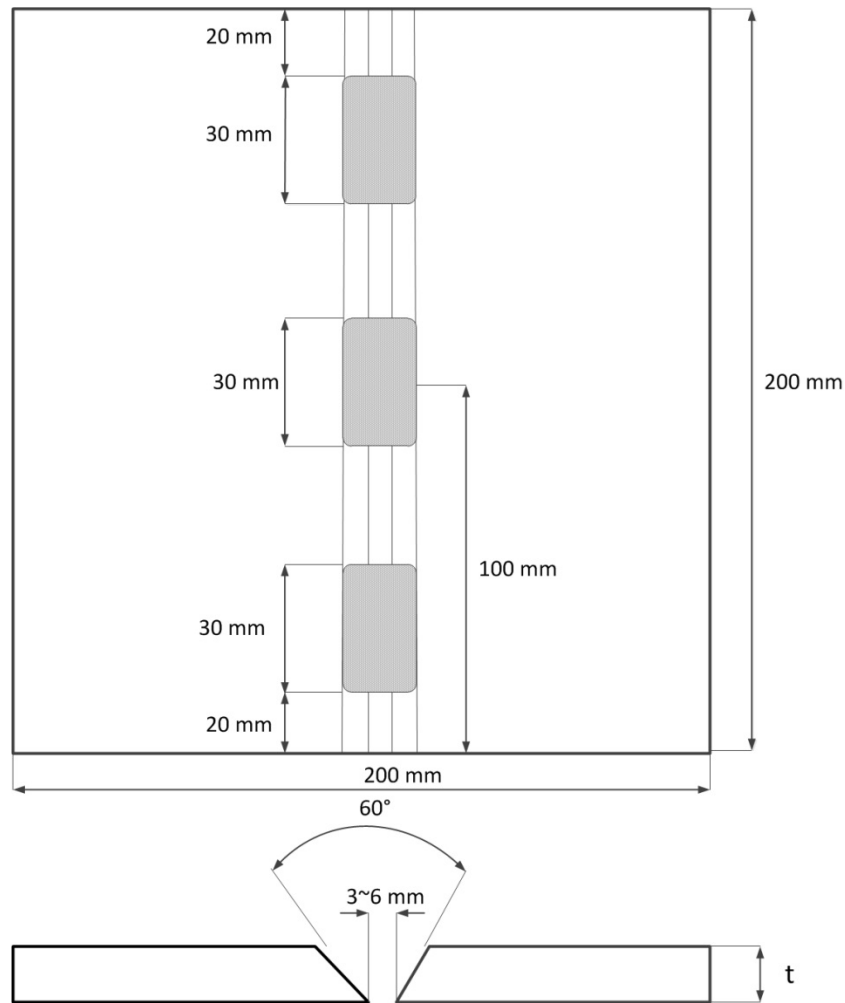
Dimensions and types of test assembly for butt tack welding
